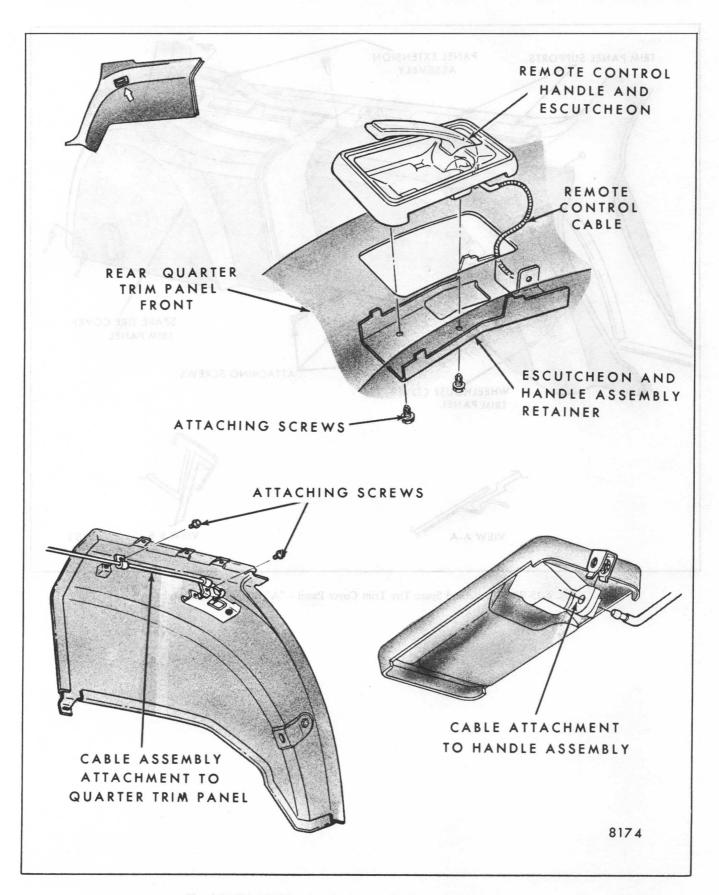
Third Folding Seat Back Lock Handle and Cable Assembly
